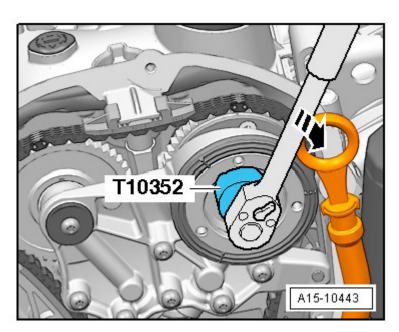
Identifying Assembly Tool T10352 To Remove Control Valve
